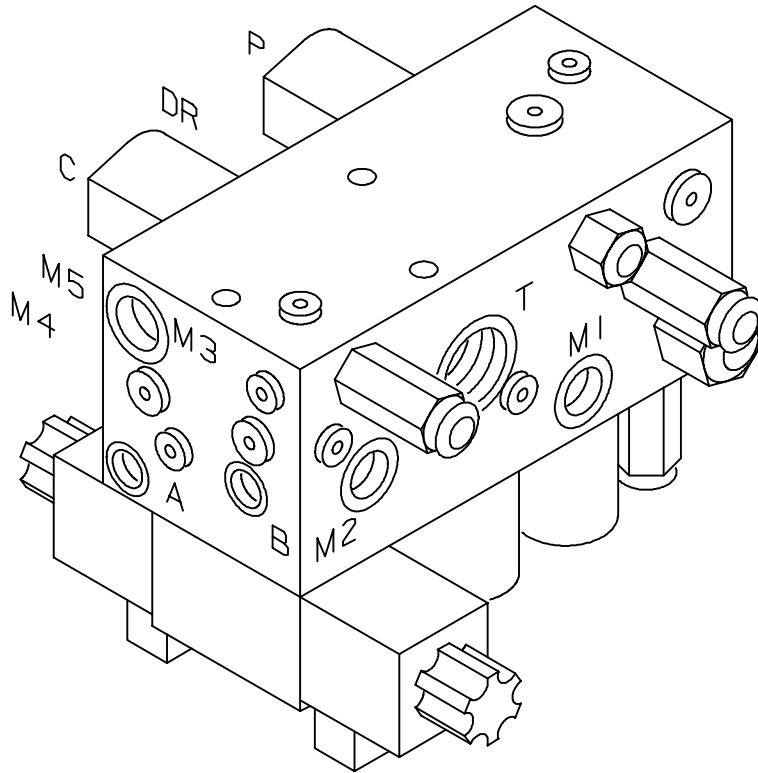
Hydraulic Solenoid Valve Breakdown, 35491
